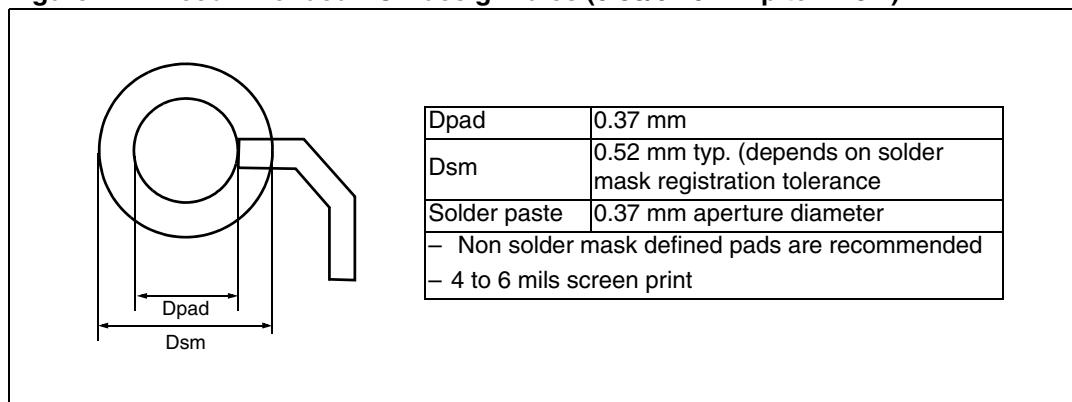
Recommended PCB design rules (0.80/0.75mm pitch BGA)
